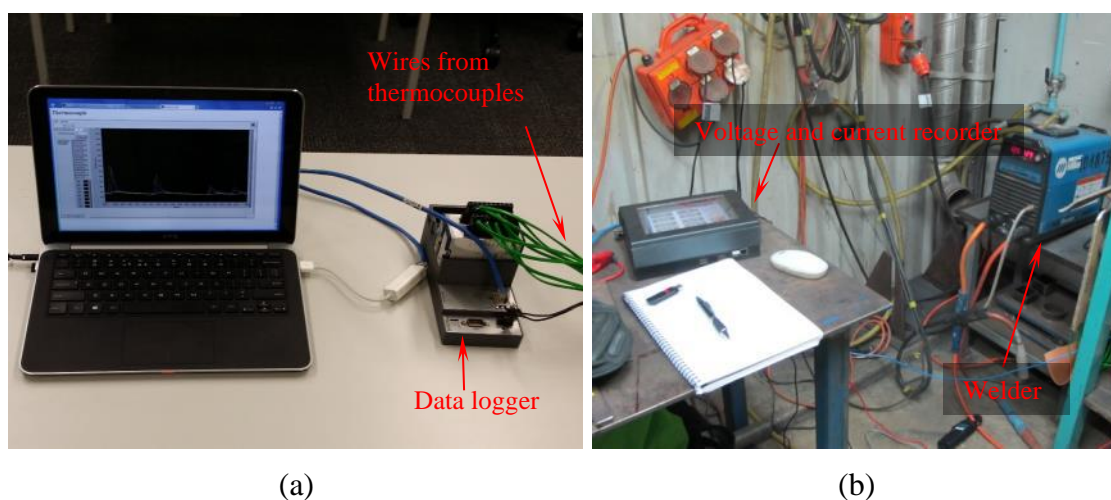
Weld experiment data acquisition set-up (a) recording of temperature histories and (b) MMA welder and welding current and voltage measurement set-up
